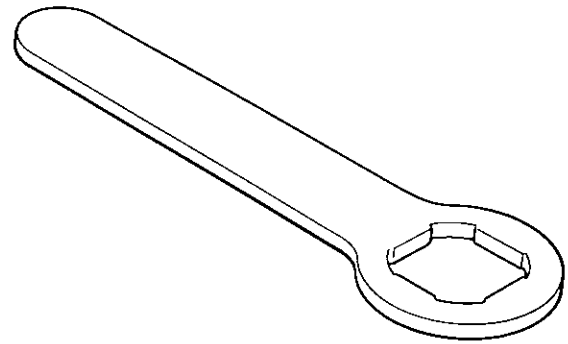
SPECIAL SPANNER DB 8009 FOR RING NUT
